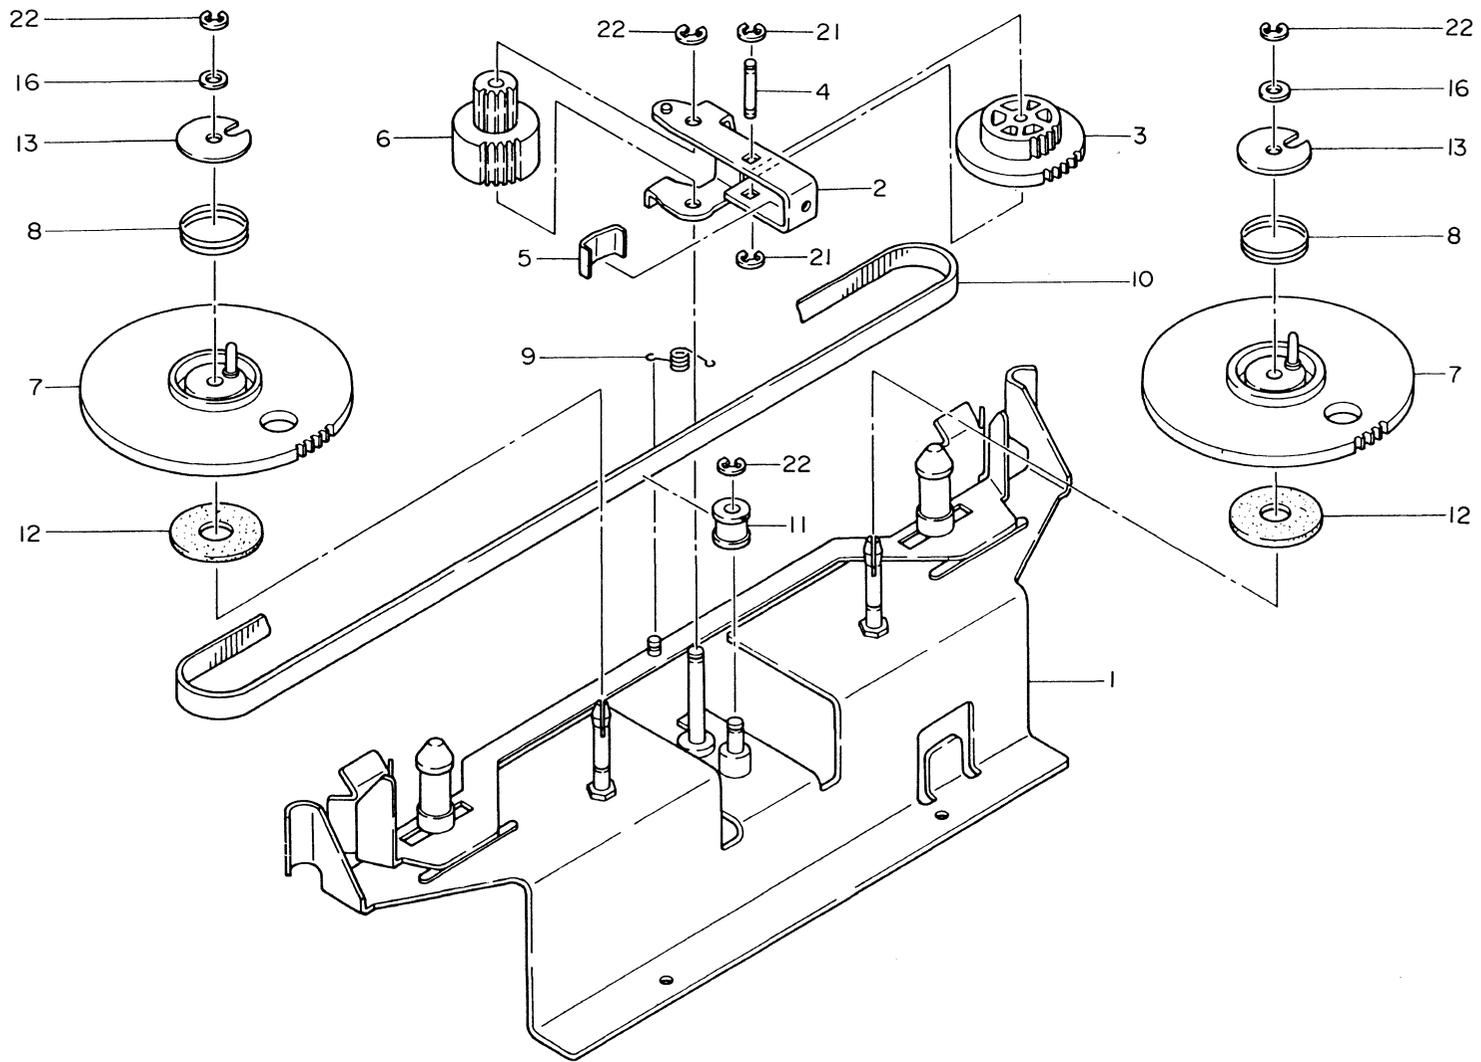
Ribbon Drive Assembly (3LR-192190)
